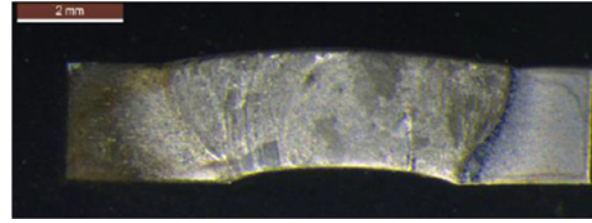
Macrostructure of Inconel 718 – 410 MSS dissimilar joints
